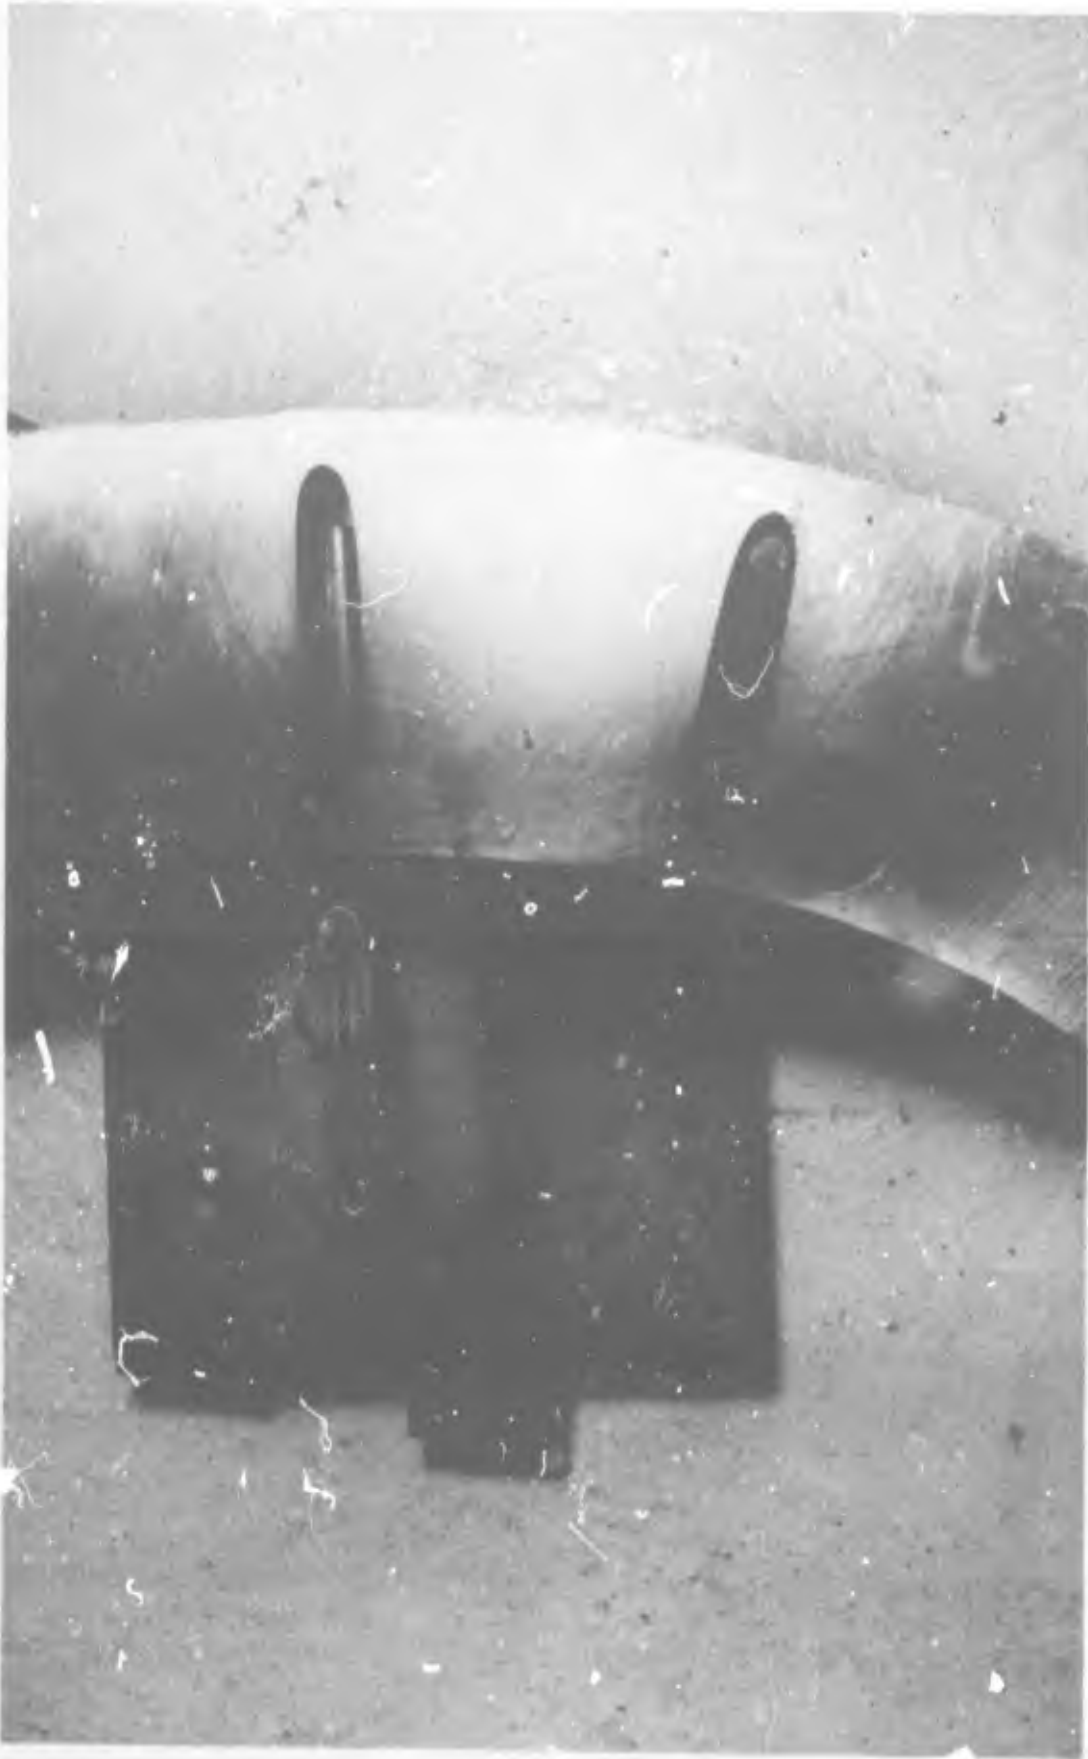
Arrow Indicates Cathode Tool Fabricated from 1020 Cold Rolled Steel
